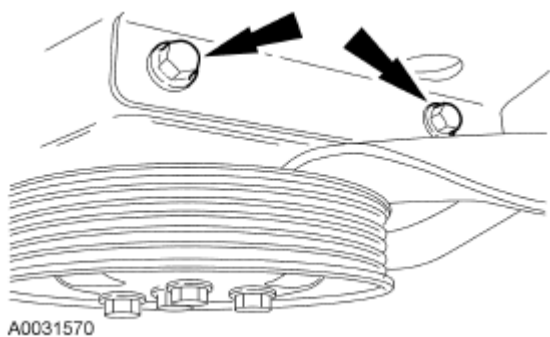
Locating Ignition Coil Bracket-To-Accessory Drive Bracket Bolts
